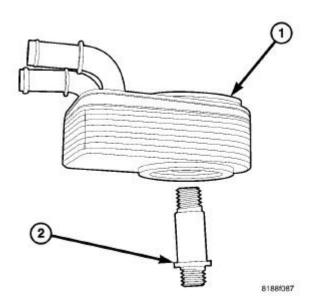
Oil Cooler & Oil Cooler Connector Bolt Courtesy of CHRYSLER GROUP, LLC
